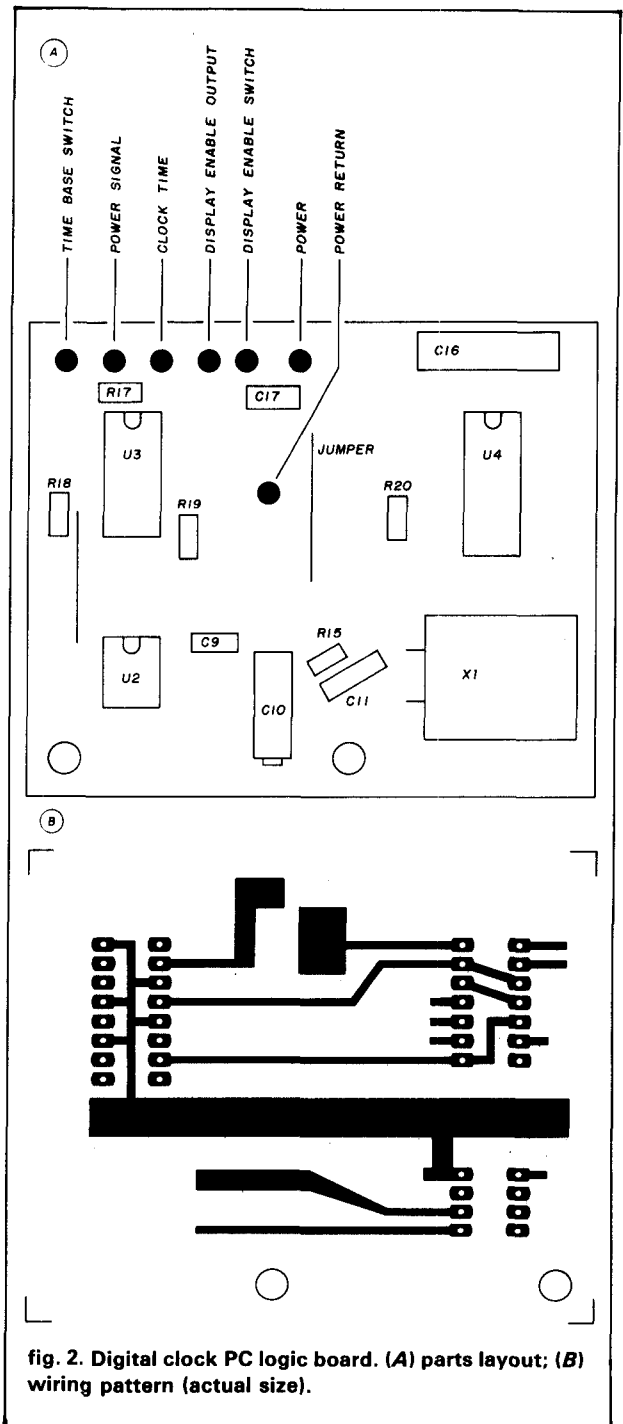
Digital clock PC logic board. (A) parts layout; (B) wiring pattern (actual size).
